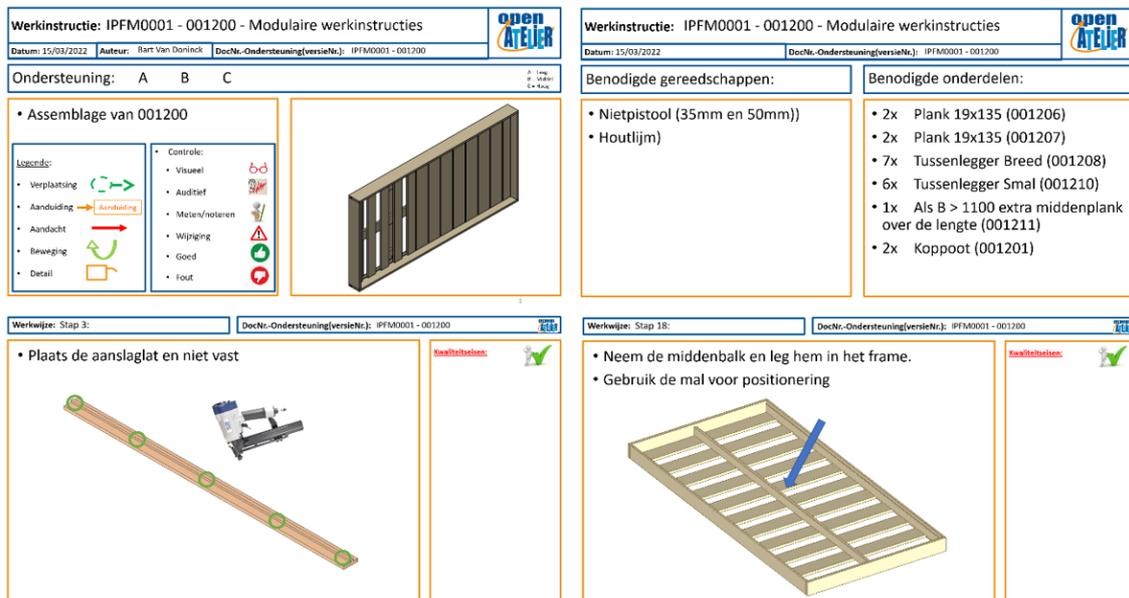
New situation: powerpoint presentations on the shop floor with detailed step by step instructions
